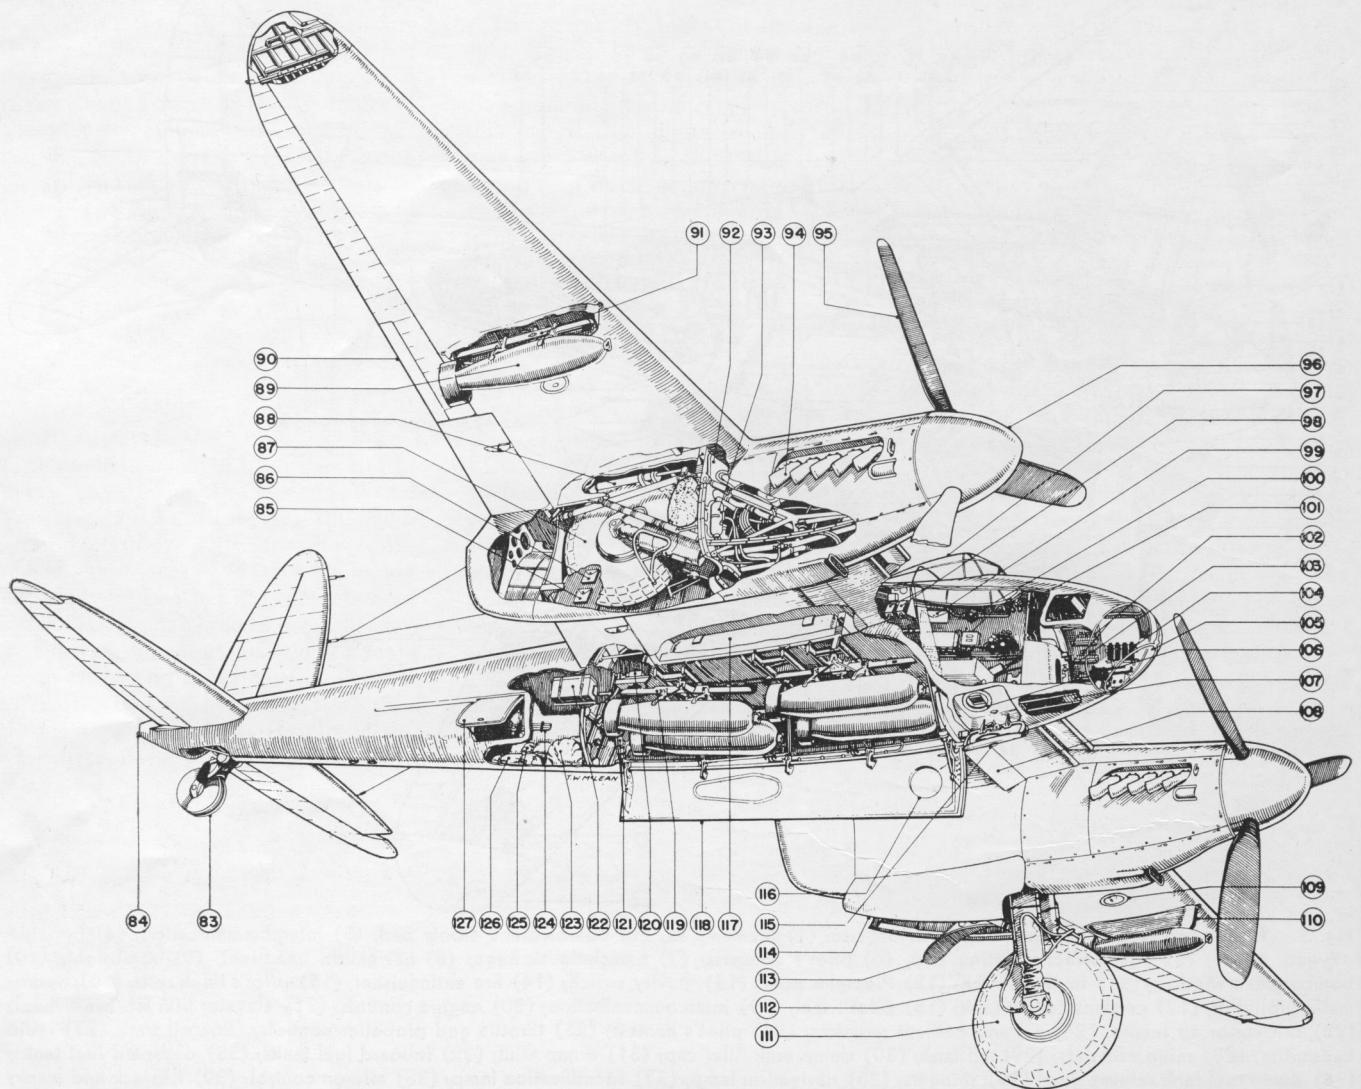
(Continued) (83) tail-wheel stowage; (84) navigation light; (85) stowage picketing eyes; (86) stowage, landing gear locking cap; (87) landing gear retracted; (88) landing gear jack; (89) 500-lb bomb; (90) aileron trim tab; (91) universal bomb carrier; (92) fire wall; (93) fire extinguisher; (94) stub exhaust; (95) propeller; (96) spinner; (97) cockpit canopy; (98) radio remote-control boxes; (99) pilot's pouch; (100) pilot's demand oxygen regulator; (101) dimmer switches; (102) signal cartridges; (103) fire extinguisher; (104) thermos bottles; (105) glycol spray; (106) tail driftsight; (107) ladder stowage; (108) radiator flap; (109) landing light; (110) wing bond fairing; (111) landing wheel; (112) brake hose; (113) mud guard; (114) landing gear doors; (115) entrance door; (116) camera window; (117) center fuel tank; (118) bomb-bay doors; (119) bomb carriers; (120) bomb winch; (121) bomb-bay door jack; (122) ration container; (123) engine covers, sleeping bags, etc.; (124) locking controls, stowage; (125) signal strips; (126) emergency tool kit; (127) rear entry door.
